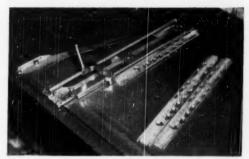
FRAME USED TO CORRECTLY POSITION FLAT MOUNTING PLATES IN PUNCHES AND DIES ON PRESS BRAKE
